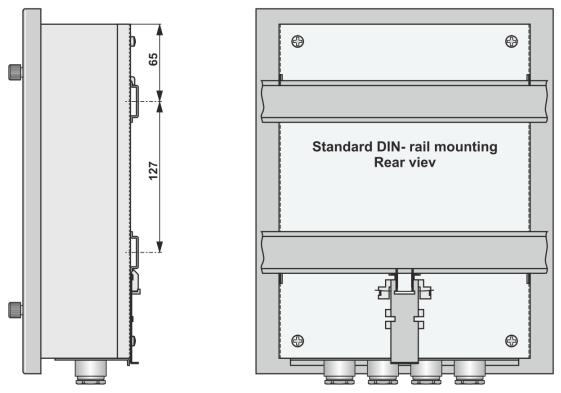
Mechanical dimensions, standard DIN-rail assembling
